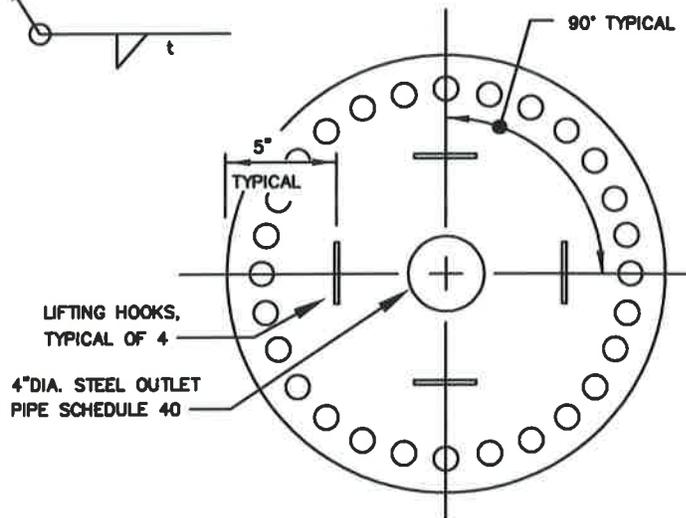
DETAIL OF ENTRY PORT BLIND FLANGE WITH 4" OUTLET
